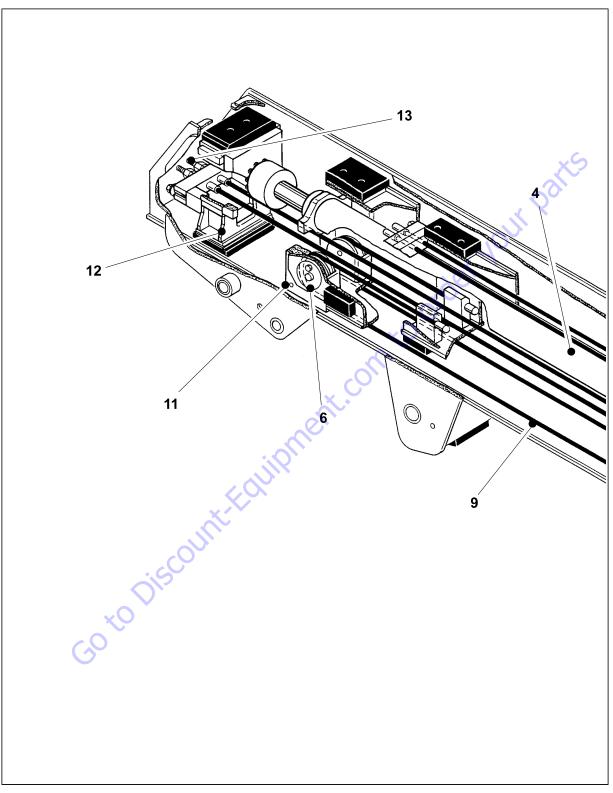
Boom Assembly Cutaway - Sheet 1 of 3
